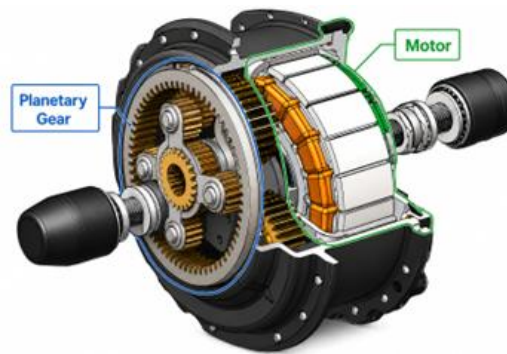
Cross-sectional diagram of a hub motor with a planetary gear system
